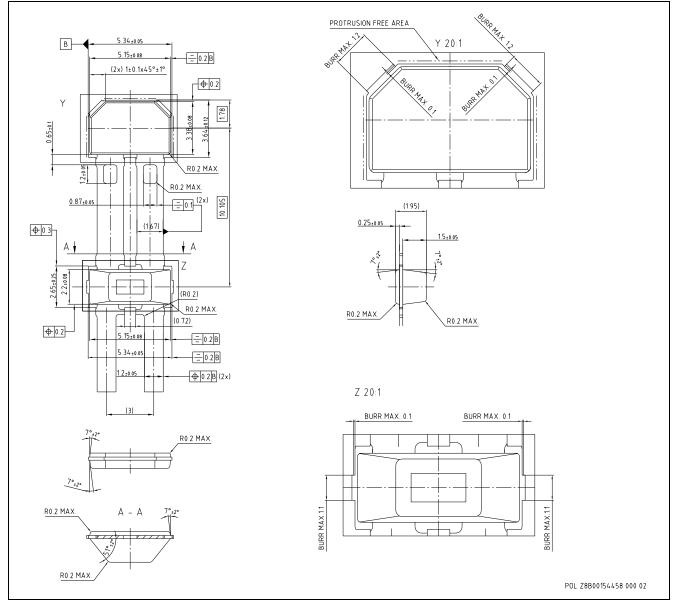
Package Dimensions in mm of PG-SSO-2-53 (Plastic Single Small Outline Package)
